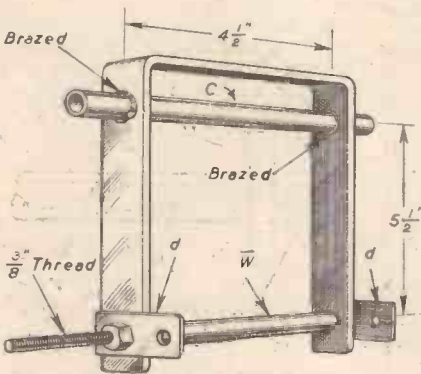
Details of pedal construction showing the brazed joints, and brackets to take the footboards.
